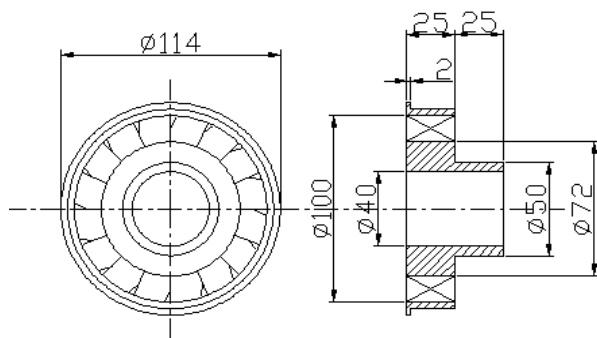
Dimensions and detailed construction of the combustion air swirler, (Dimensions in mm)
